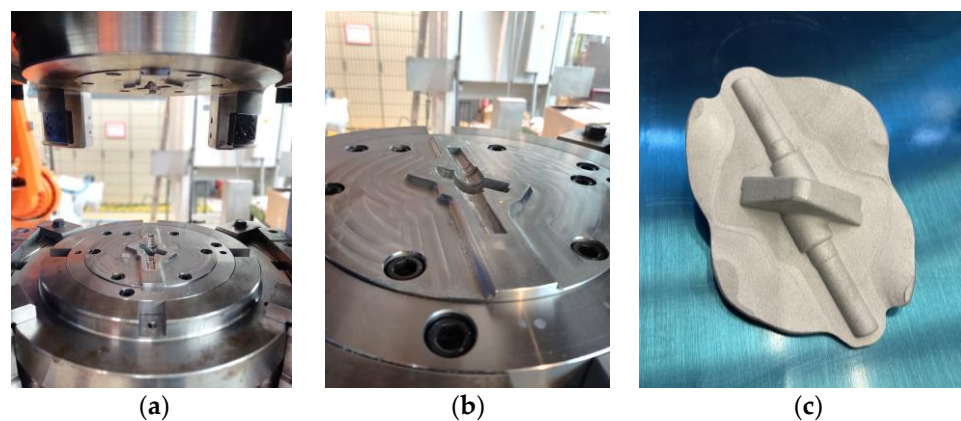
Assembly of the L-PBF manufactured dies mounted in the press (a) with a die holder (b) and the forged part (c).
